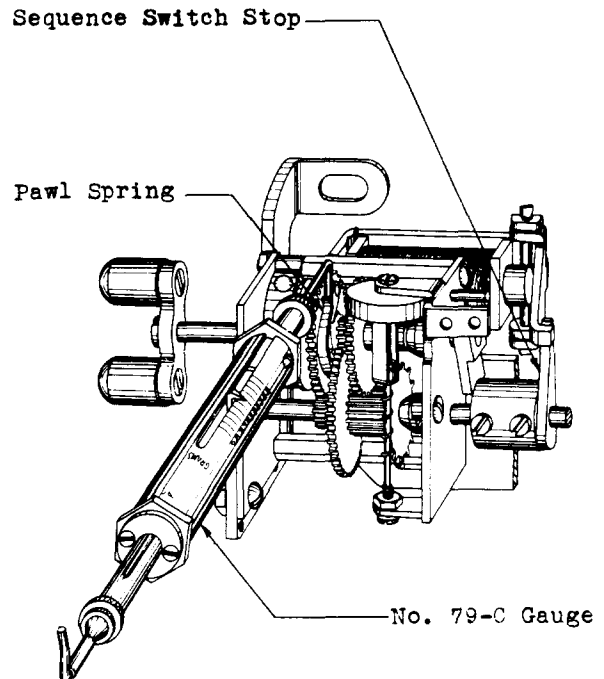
Method of Measuring Pawl Spring Tension with the No. 79-C Gauge
